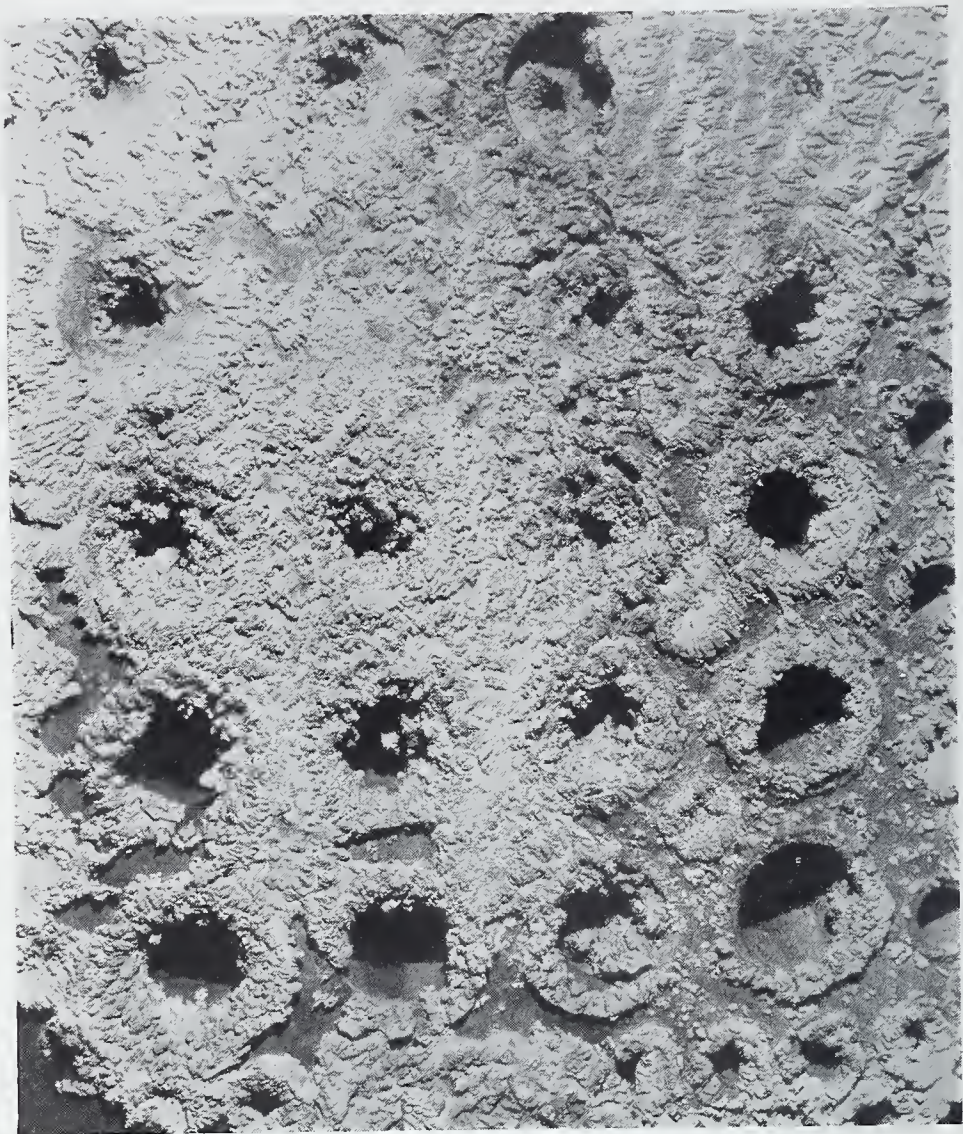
“ HONEYCOMBING ” ON TUBE SHEET OF LOCOMOTIVE.
